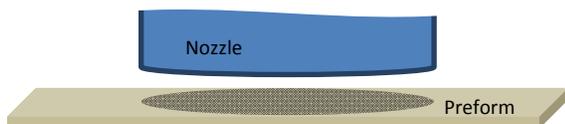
The component placement nozzle should be as large as possible to minimize preform bending.
